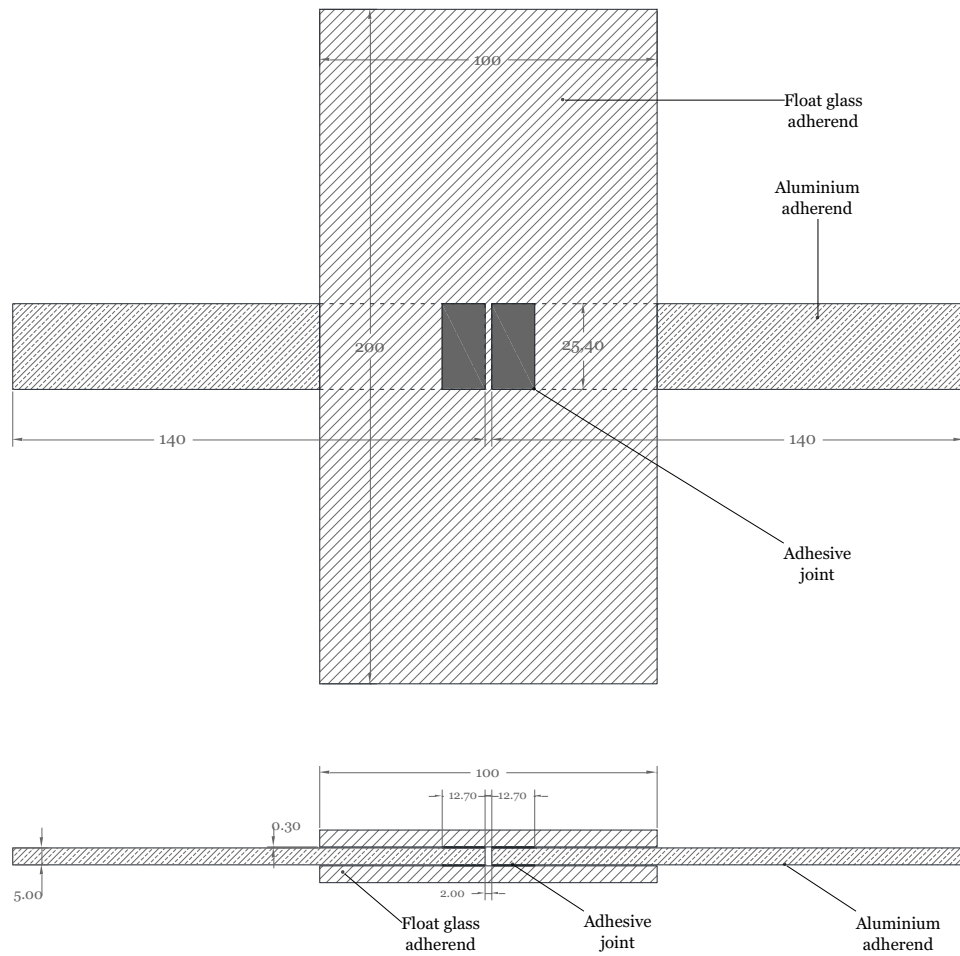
Double-lap specimens geometry (mm), section view and plan view.
